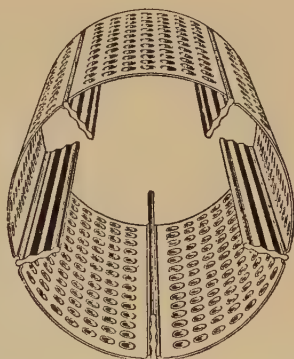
The perforated cylinder of a washing machine. (Courtesy, Hurley Machine Co.)
